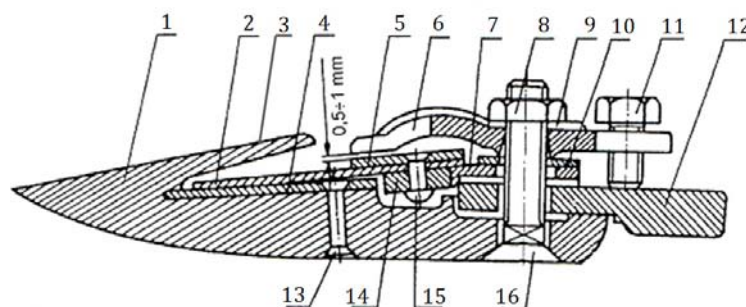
Cross-section of scissors-fingers cutting tool [1]:
